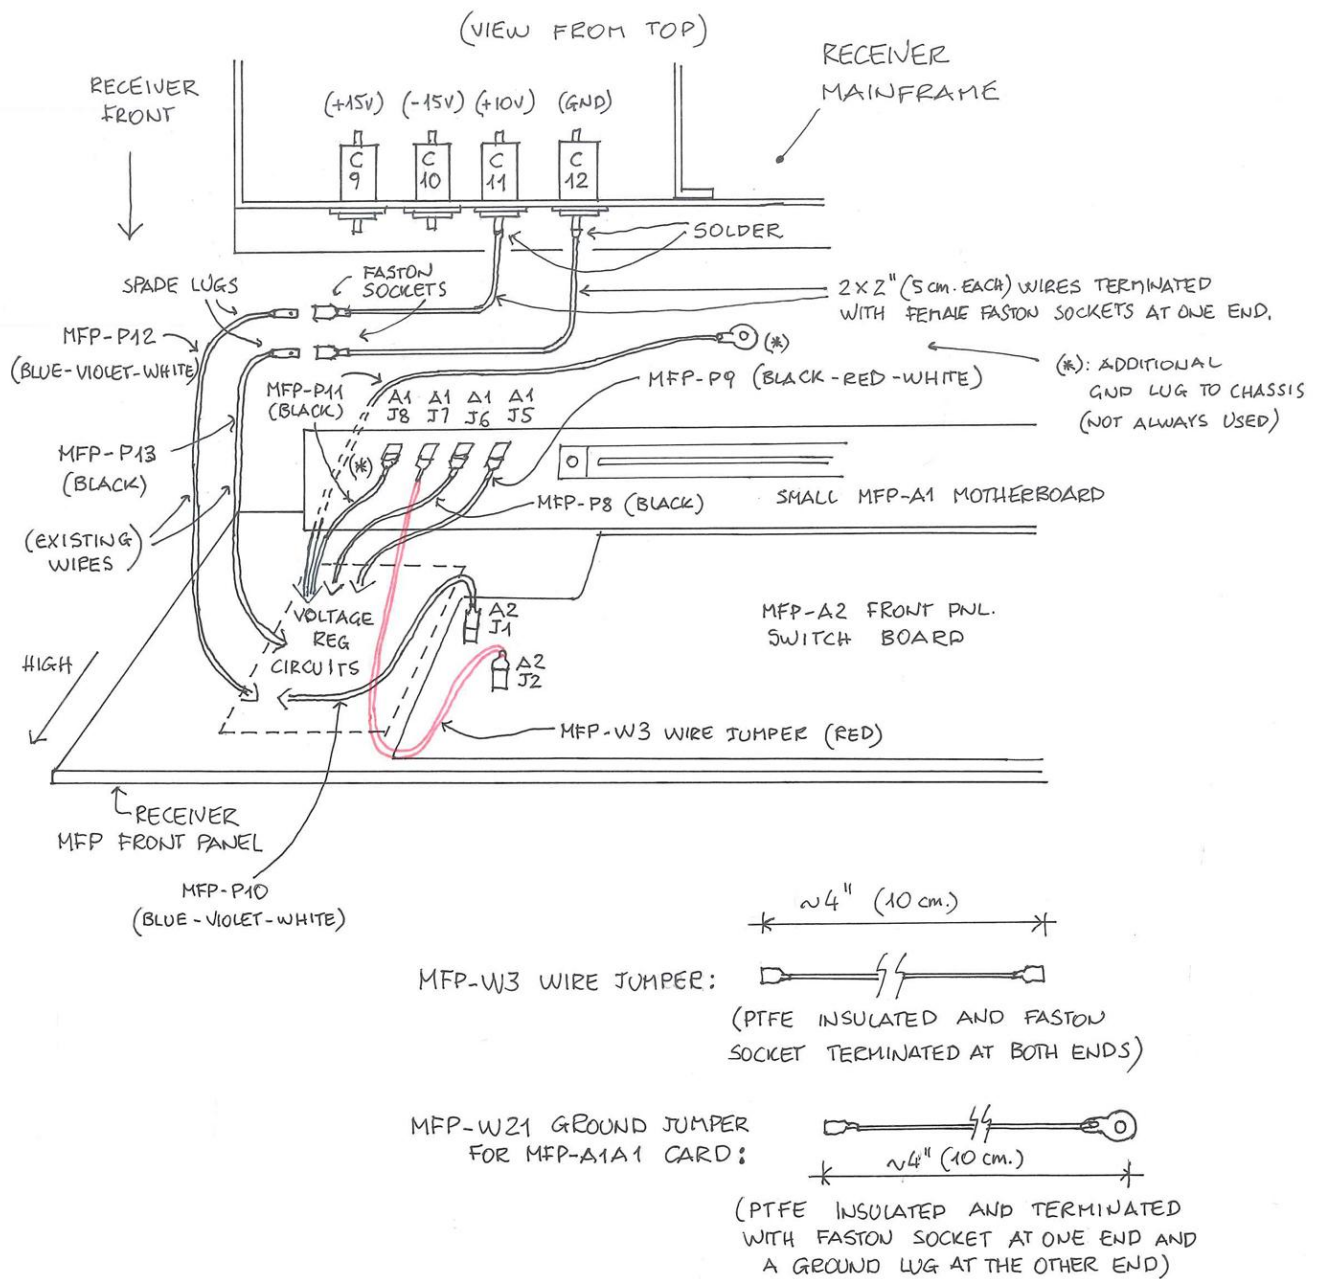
Overall diagram of the MFP Front Panel Assembly.
